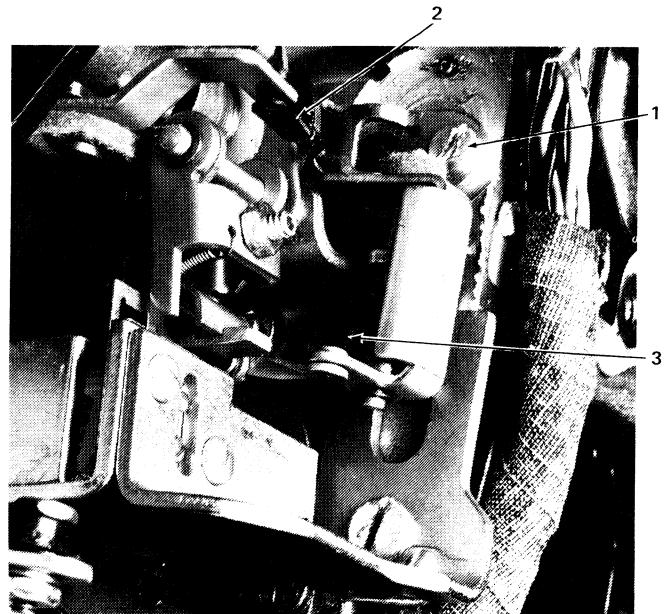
Selector Bail Removal (Left Side, Printer Tilted Up)
